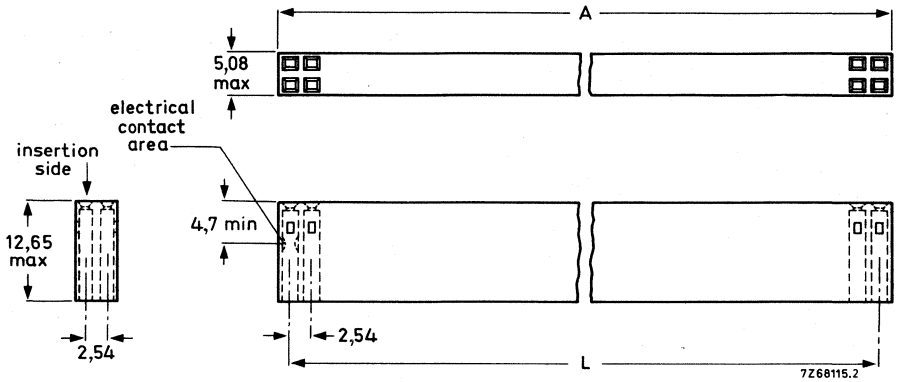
Cable connector, double row; see Table 3 for dimensions A and L.
